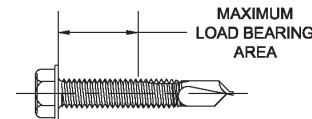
INDENTED HEX WASHER HEAD WITH SHANK SLOT LOAD BEARING AREA
